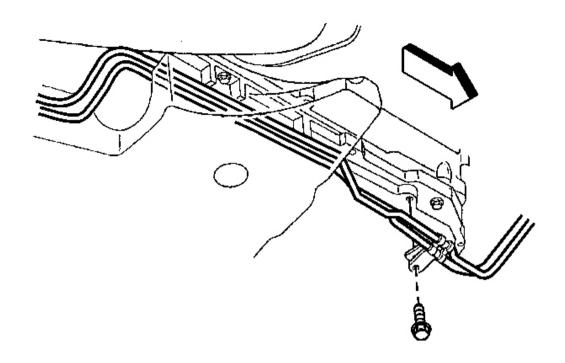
TOC Front Pipe, Front Retaining Clamp & Bolt Courtesy of GENERAL MOTORS CORP.
